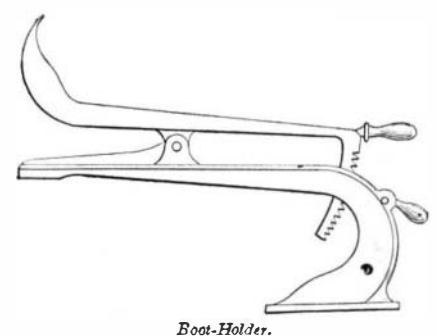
BOOT HOLDER, for holding the boot during the process of manufacture.
